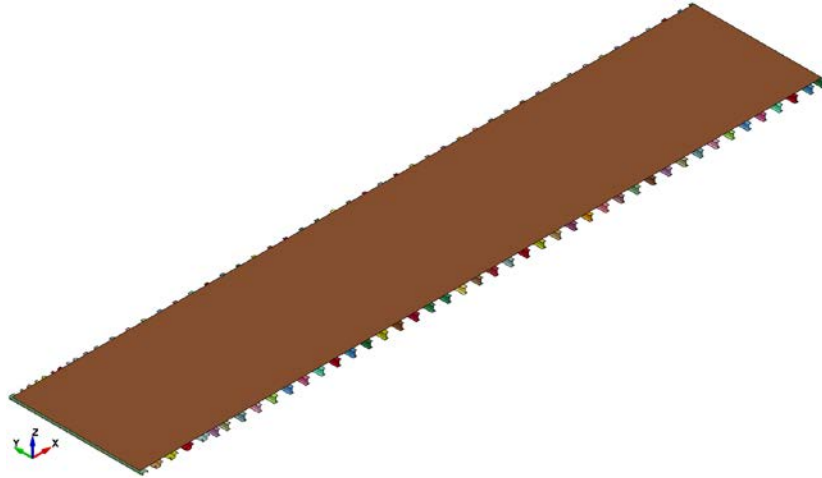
Finite Element Model for Oak Floor Supported by Cross Members.
